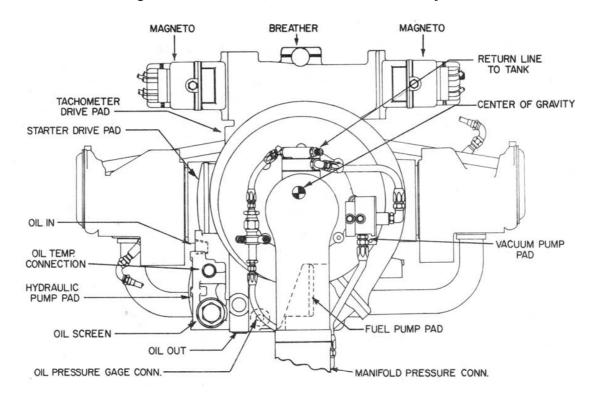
Rear View, IGSO-480 – Bendix Injector
